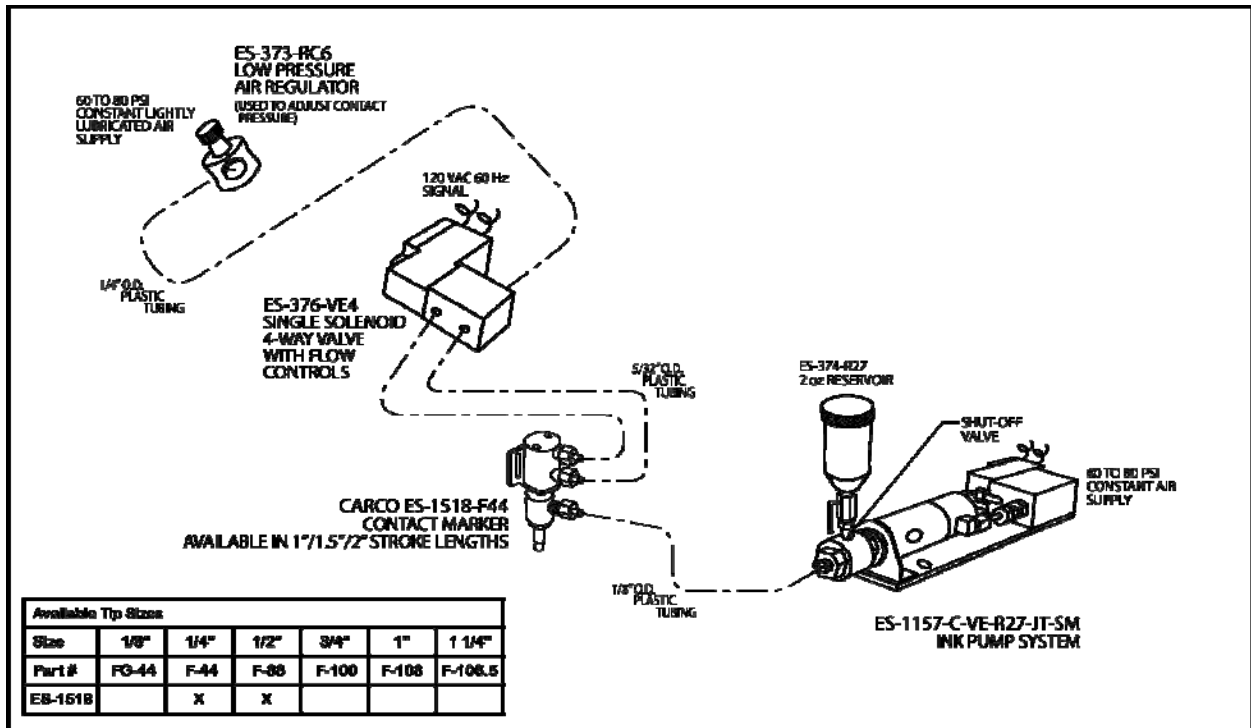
Carco ES-1518-A Mini-Spring Contact Marker
